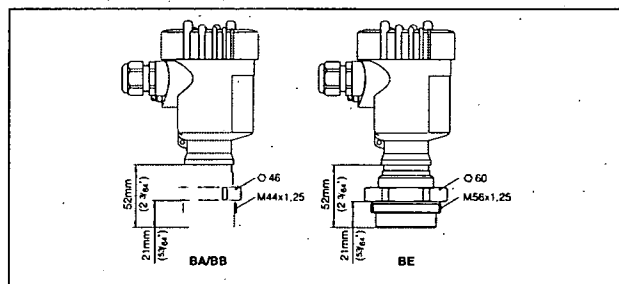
VEGABAR 64, threaded fitting for the paper industry; BA/BB = M44x1.25; BE = M56x1.25
